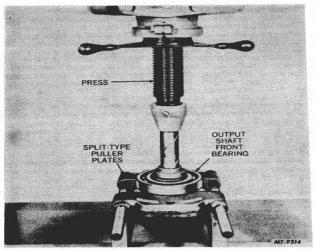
Separating Output Shaft Side Gear from Front Bearing
